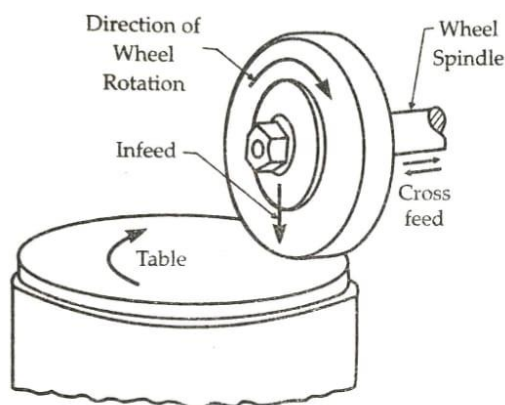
Relative movements of different parts of a Horizontal Spindle Rotary Table Surface Grinder.
